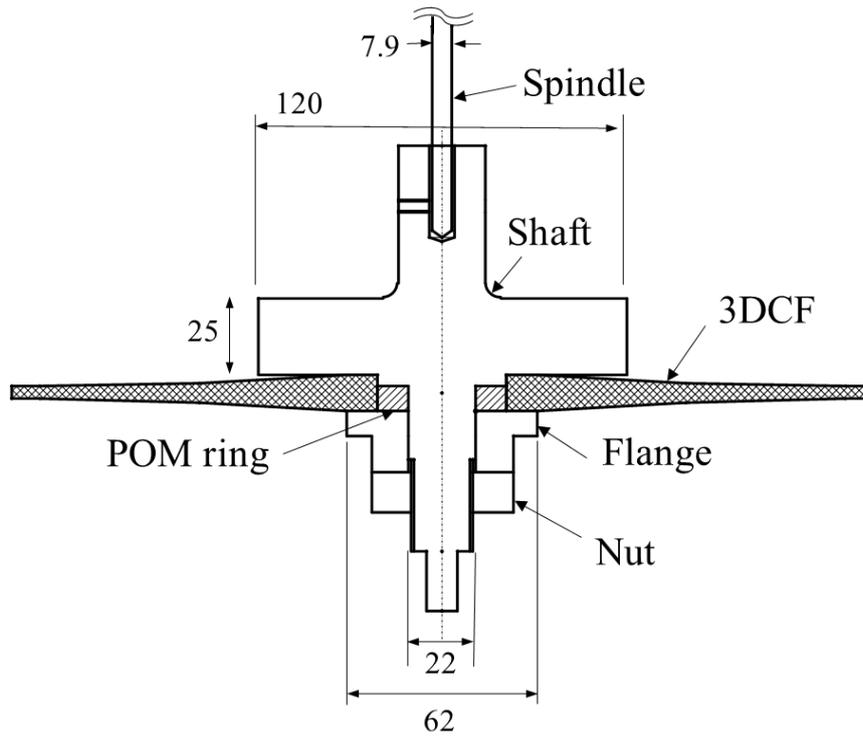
Test fixtures for spin tests using POM ring between 3DCF and shaft (type III).
